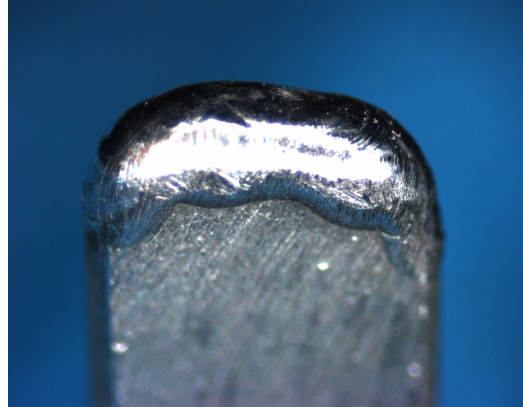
Welded joint of the heat pipe capillary
